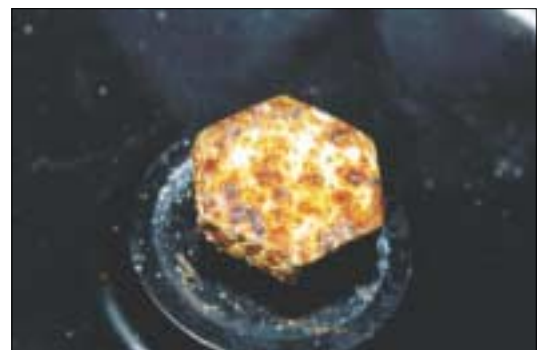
Corroded Bolt head together containing a white deposit together with brown coloured rust.
